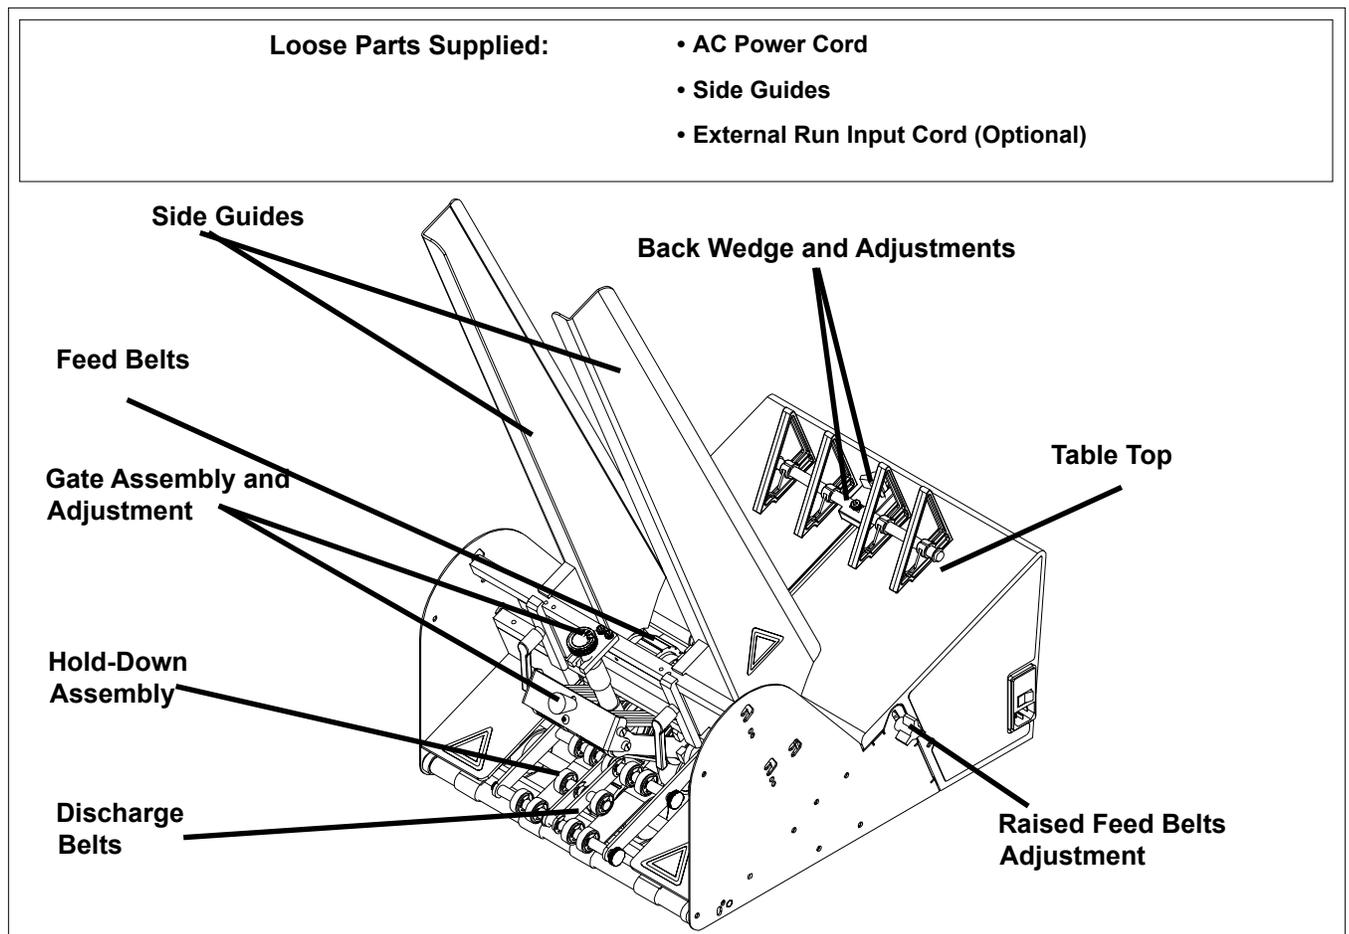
Main Assemblies of the V-710IJ Universal Friction Feeder
